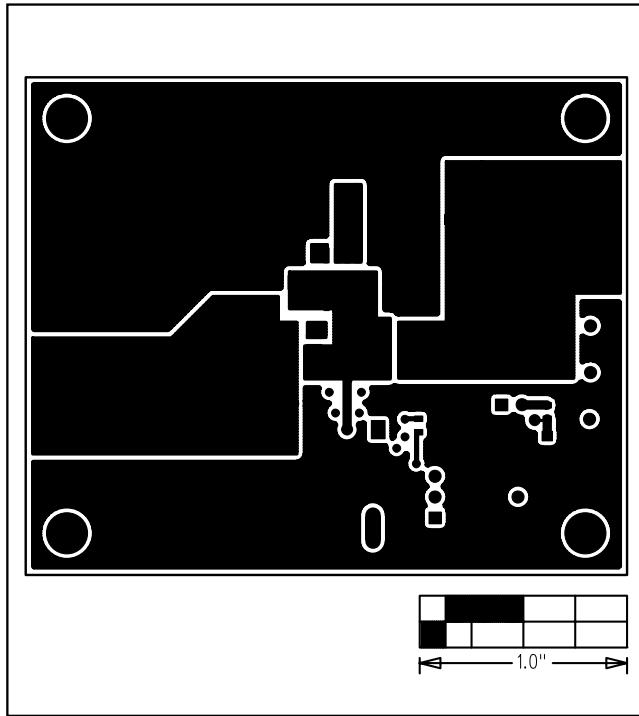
MAX17024 EV Kit PCB Layout—Component Side
